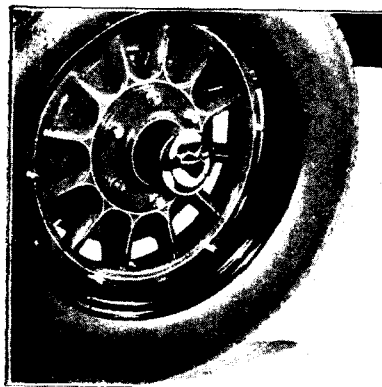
Then rotate the wheel until the valve stem approaches the bottom, when the rim and tire will roll free from the wheel and can be removed without lifting.
